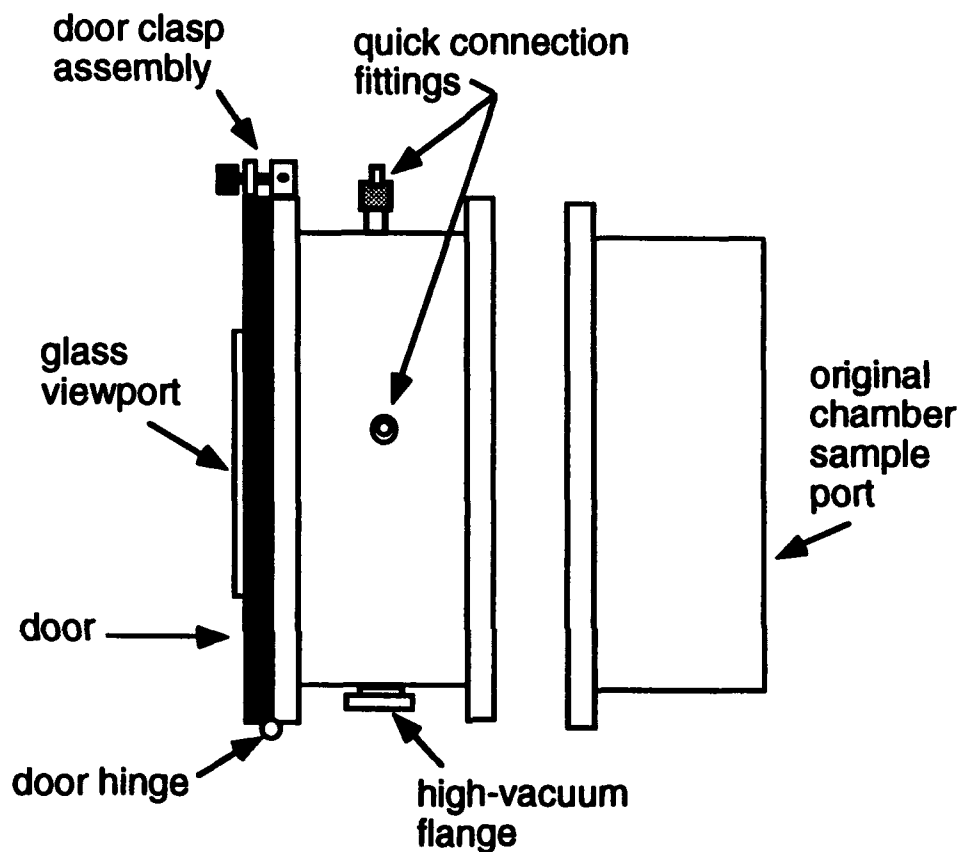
Schematic Diagram of the Chamber Sample Port Extension Assembly.
